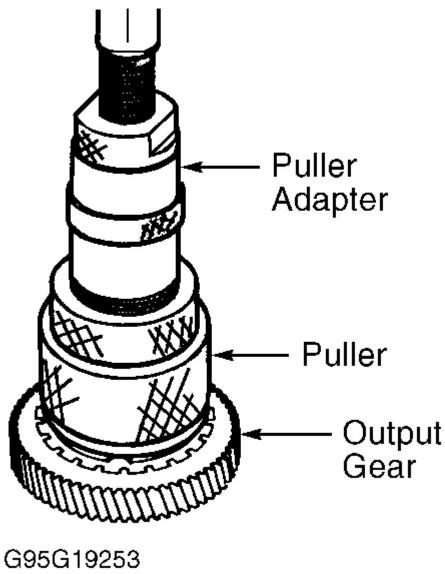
Removing Output Gear Roller Bearing Courtesy of VOLKSWAGEN UNITED STATES, INC.
